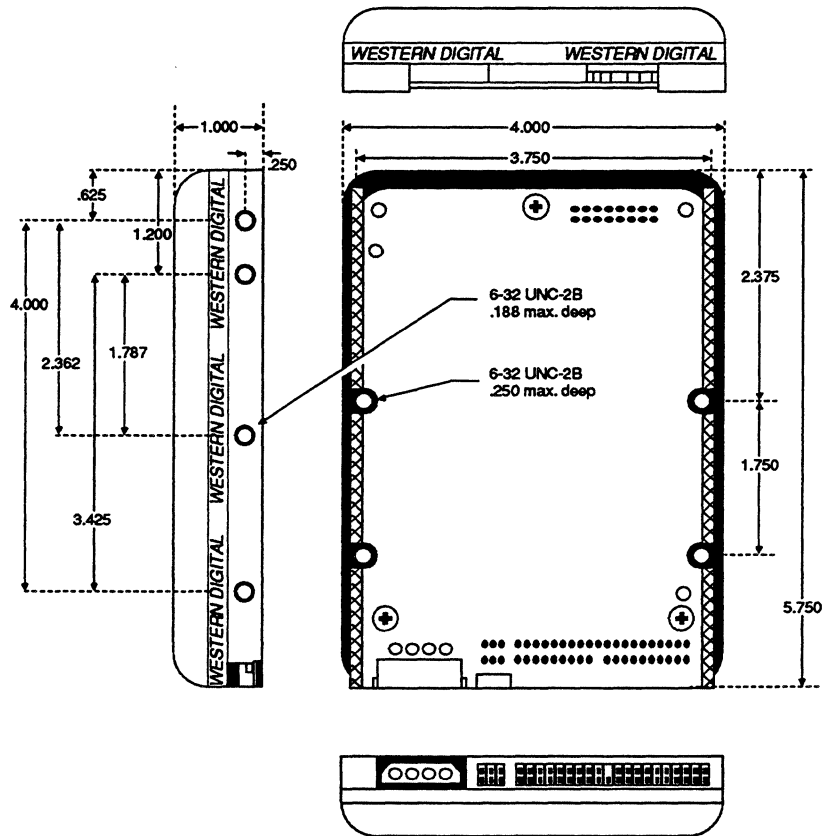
Caviar AC160/AC2120 Mounting Dimensions
